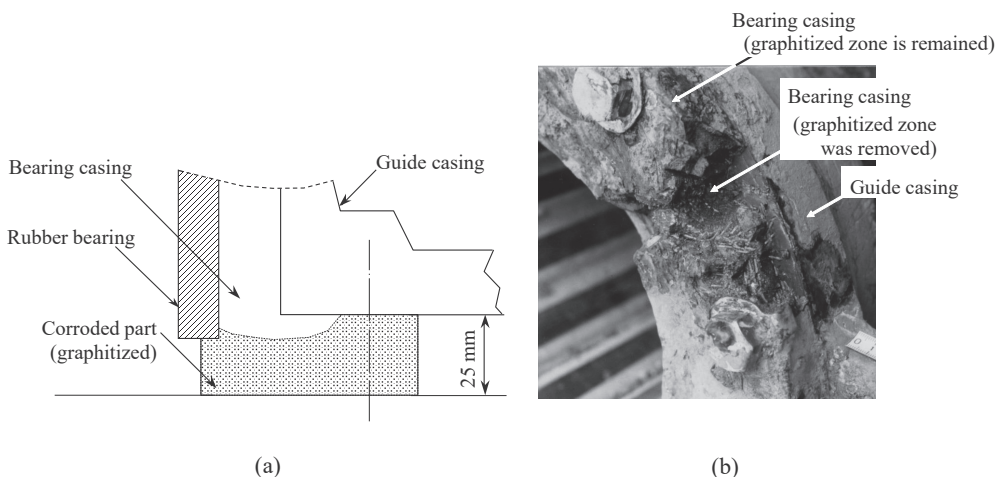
Galvanic corrosion of bearing casing¹⁾. (a) cross section of bearing casing and guide casing. (b) corroded part of bearing casing.
